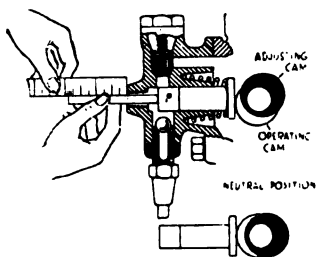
Left—Sectional view of the oil pump, showing method of measuring the stroke. With the engine idling, the stroke should be about 1/16 in. when speed is about 1/16 in. The small vertical spring at the top should be stretched or shortened until the oil pressure gage reads 2½ lbs. with the engine speeding, and the cam in the neutral position.
